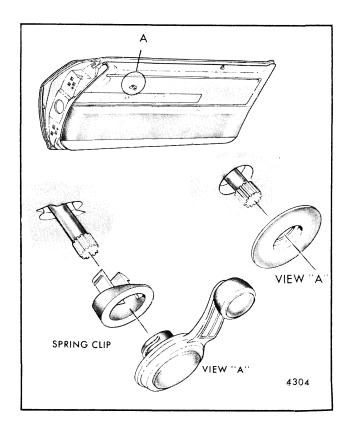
Typical Window Regulator Handle Assembly Installation
